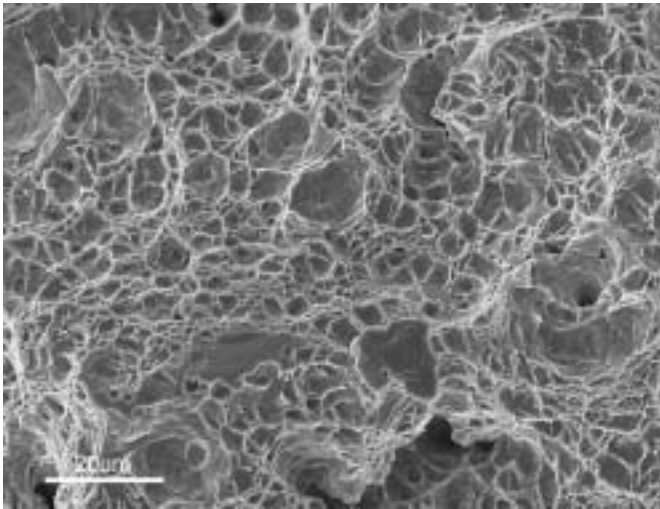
Ductile fracture surface at the centre of the bolt.
